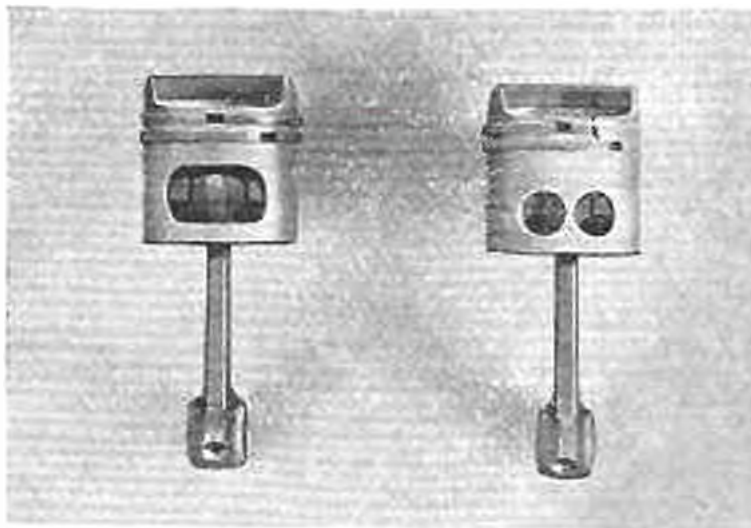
Modified piston for the McCoy .29 (left), with a standard piston (right).
